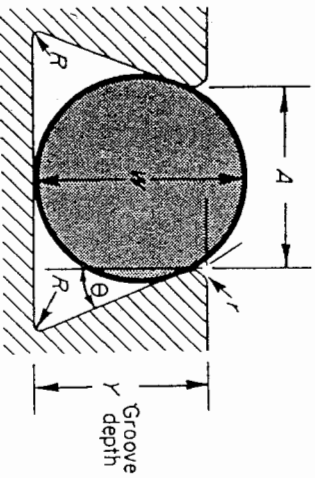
Standard Dovetail Groove Sizes for O-Ring Seals
